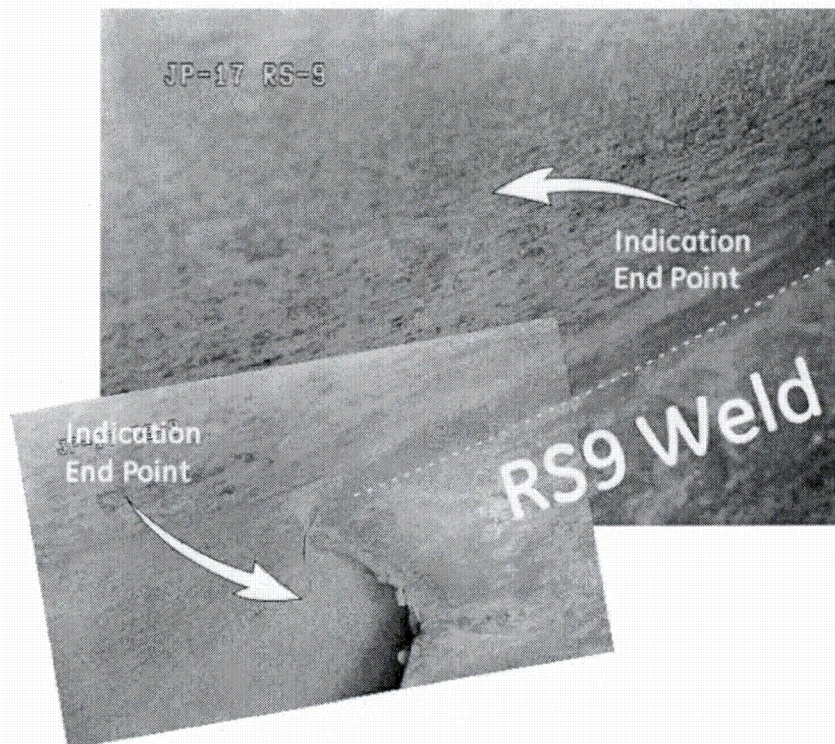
RFO21 Image of the Indication on JP-17/18 Riser RS-9 Weld
